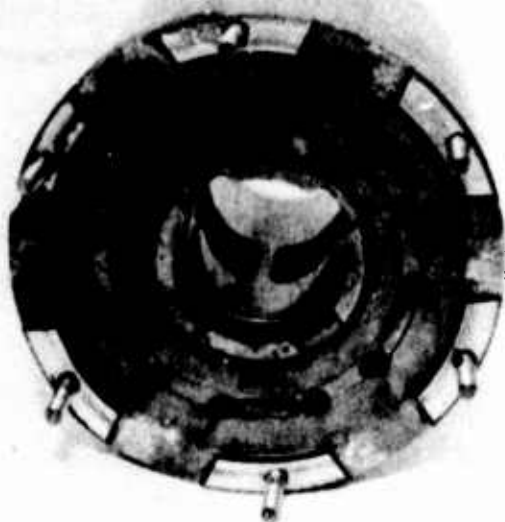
IFRT Engine No. 1, Condition of Parts after 20 Minutes
